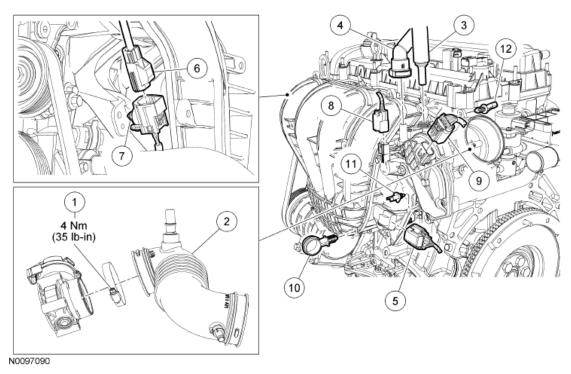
Identifying Intake Manifold Components Courtesy of FORD MOTOR CO.
